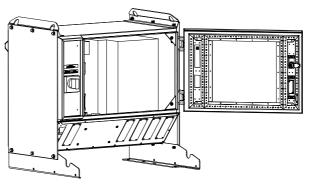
Spot Welding cabinet equipped with a weld timer from Bosch.
